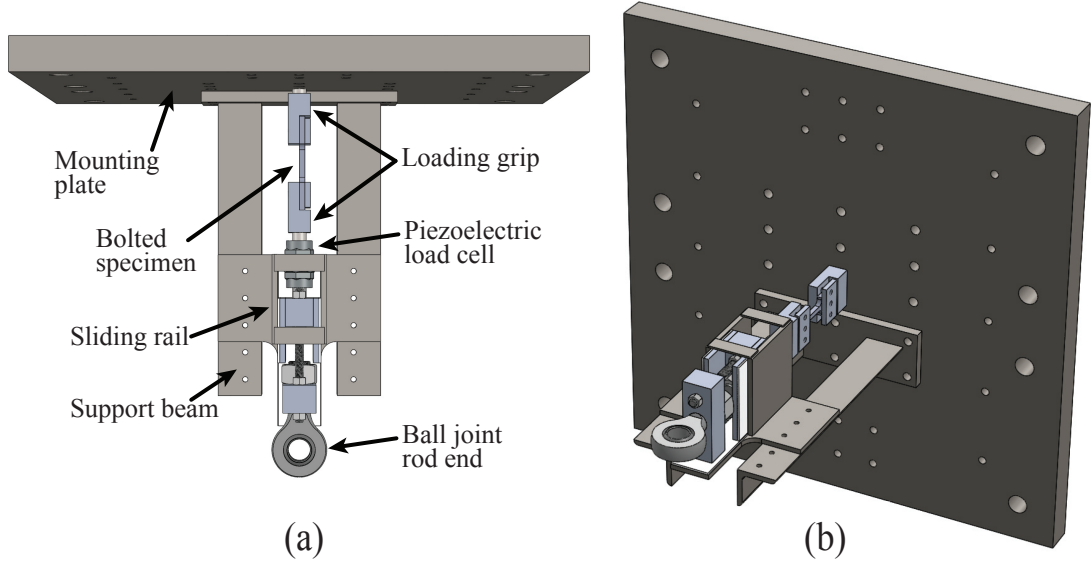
Specimen assembly: (a) top view and (b) perspective view.
